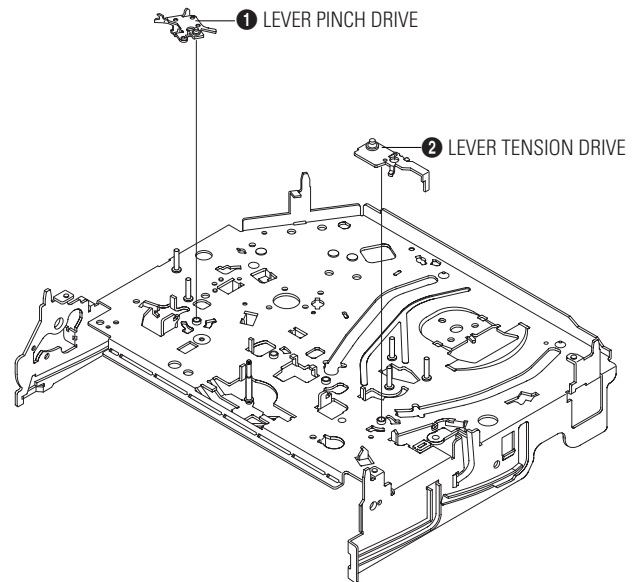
Lever Pinch Drive, Lever Tension Drive Removal
